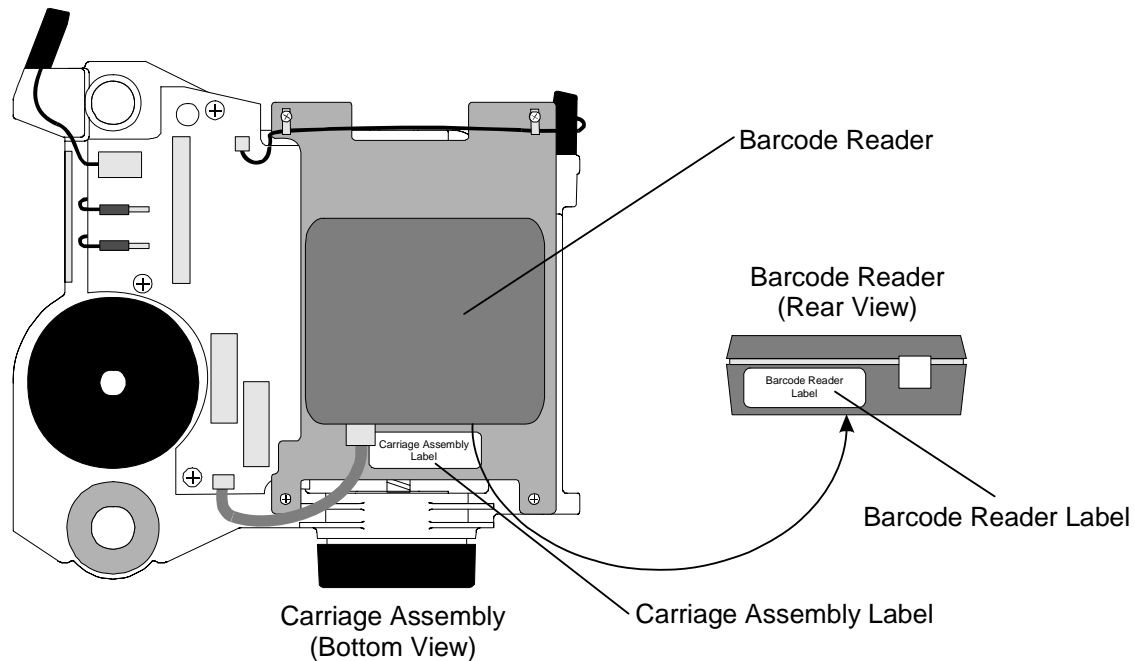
Carriage Assembly and Barcode Reader Labels
